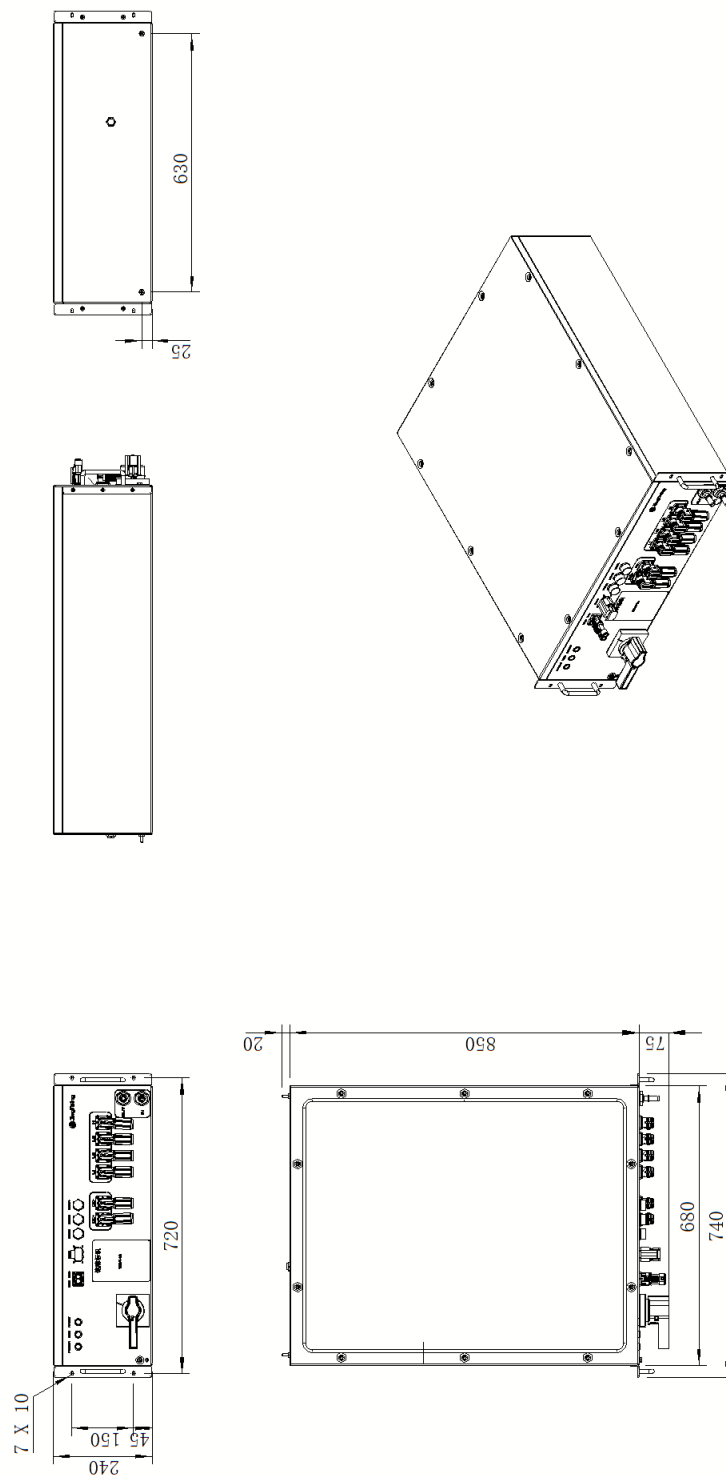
Product size drawing (Drawer structure) (unit: mm)
